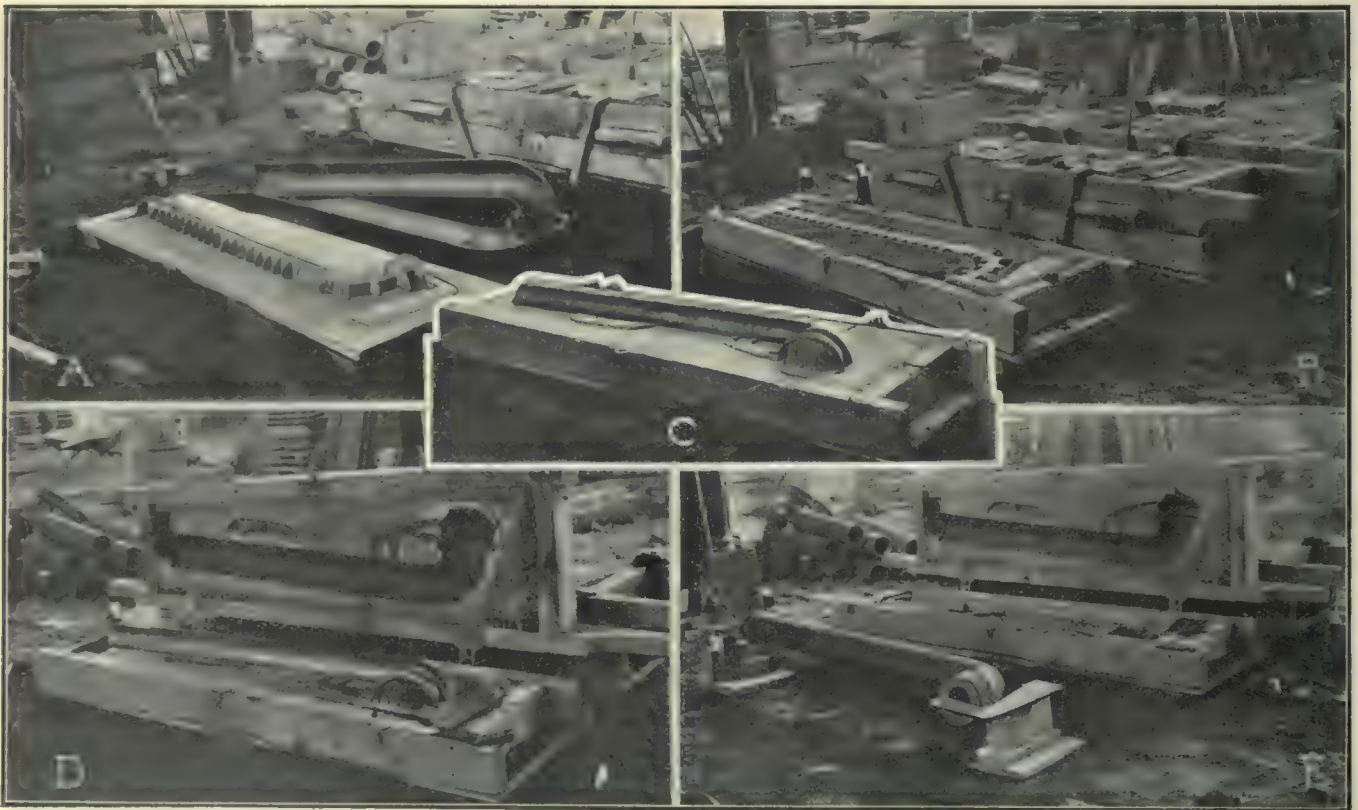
A.—Core Arbor on Bottom-board and Pattern for a Quarter Bend 36 Inches Long Behind the Bottom-board. B.—Drag Rammed Up and Arbor in Place in Pattern Ready to Form Drag Half of Core. C.—Core Finished and Pattern in Place Ready to Ram Cope. D.—Mold Finished and Cope Rolled Back. E.—Core Lifted Out to be Finished and Mold Open.
